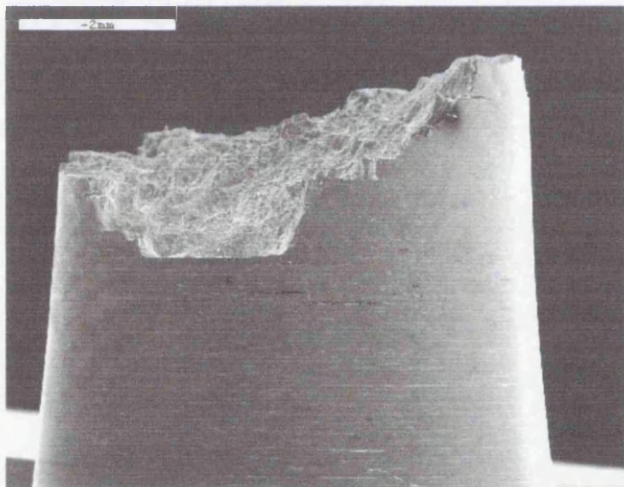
Overview of strain control fracture surface (550°C, 2 min dwell in tension)
